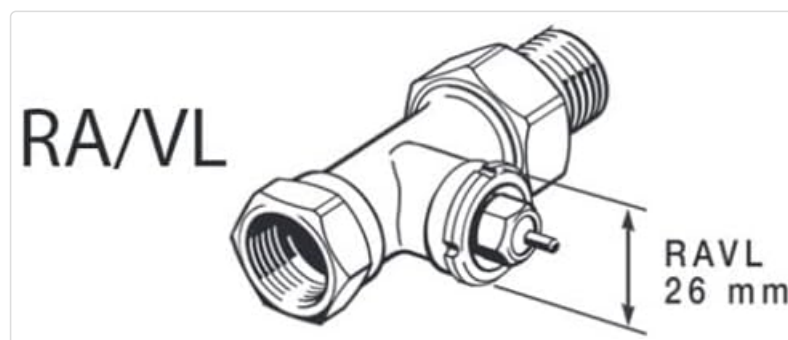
Technical diagram of a Danfoss RAVL valve body, indicating the 26 mm diameter for proper head attachment. This diagram helps identify the correct valve type.
